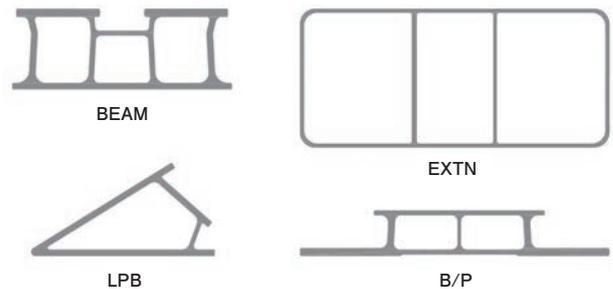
Extrusion cross-sectional shape of this bumper beam.
